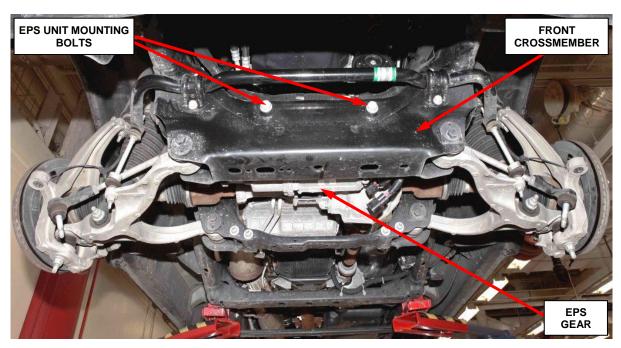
Electric Power Steering Gear Mounting Bolts (4x4 Shown)
